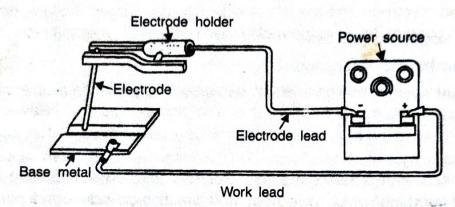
(b). Setup of Flux Shielded Metal Arc Welding.
